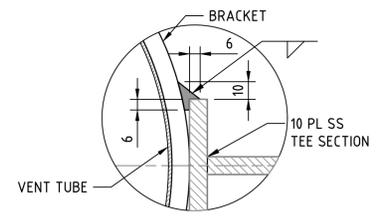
DETAIL C PLAN - SS RING BRACKET CONNECTION
